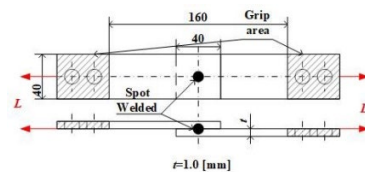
Spot-welded joints used for fatigue testing under tensile shear
